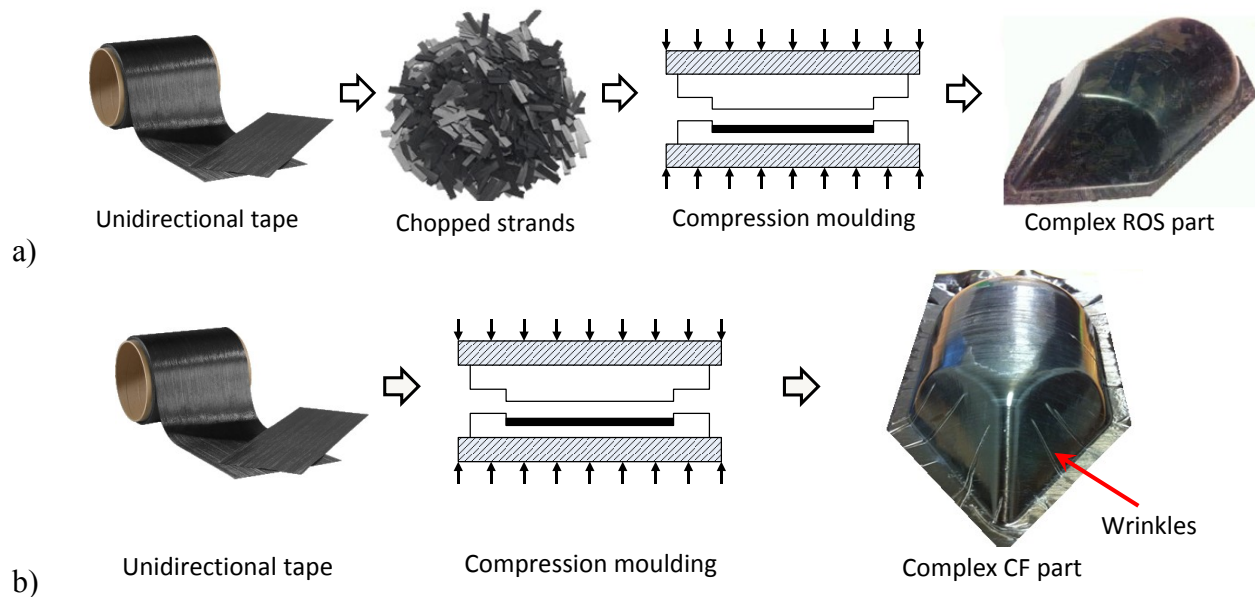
Compression moulding of a) ROS part and b) CF part with defects [14]
